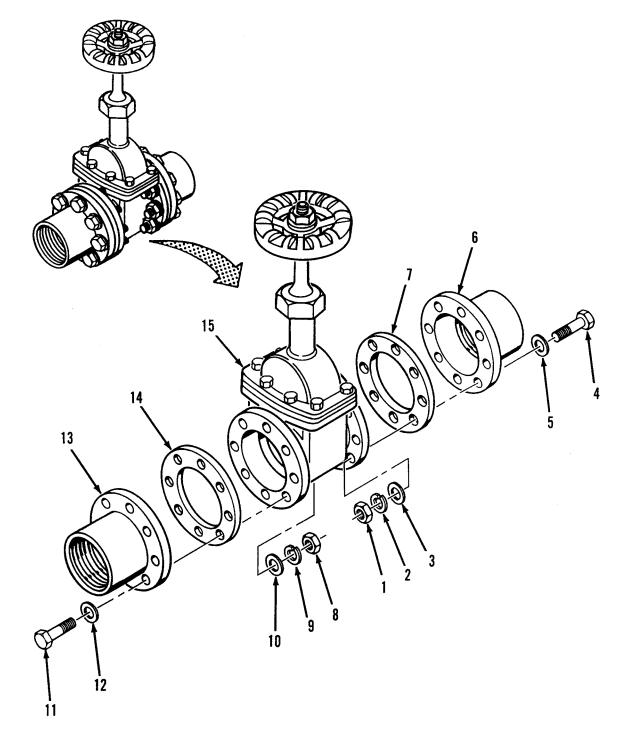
Gate Valve Disassembly (Model FIHK-100).
